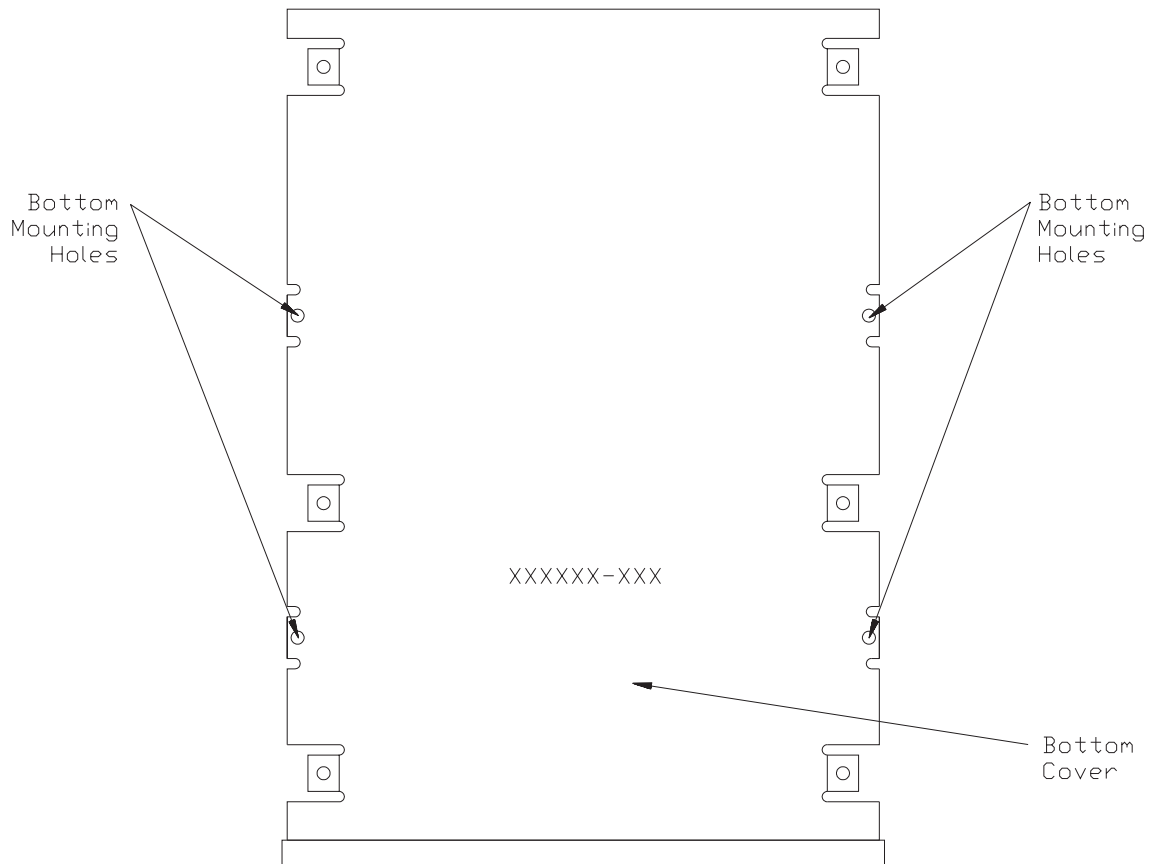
Location of Mounting Holes on the Bottom of the EXB-8200
